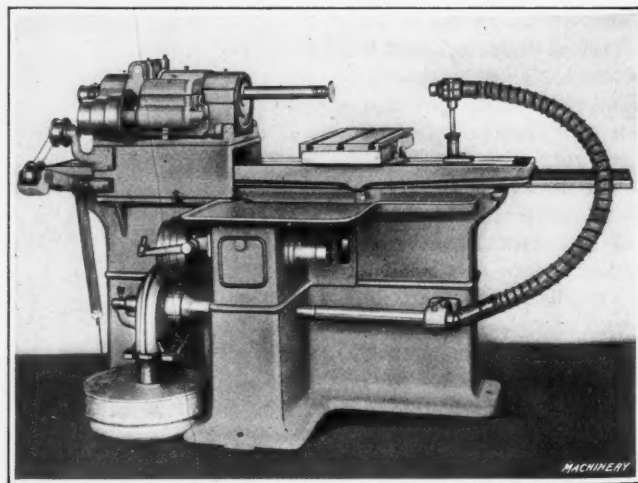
Cylinder Grinder equipped with Individual Exhaust System
